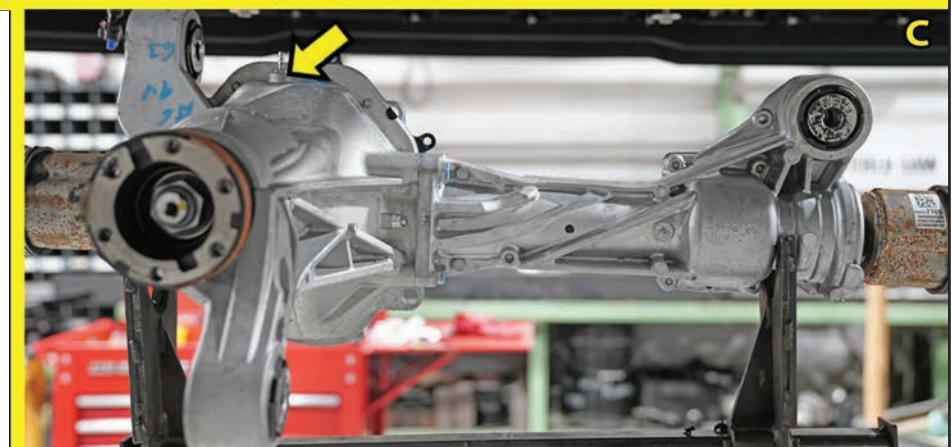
Disconnect Rear Diff Mount & Remove Rear Crossmember...15. DISCONNECT REAR DIFFERENTIAL MOUNT & REMOVE REAR CROSSMEMBER...
